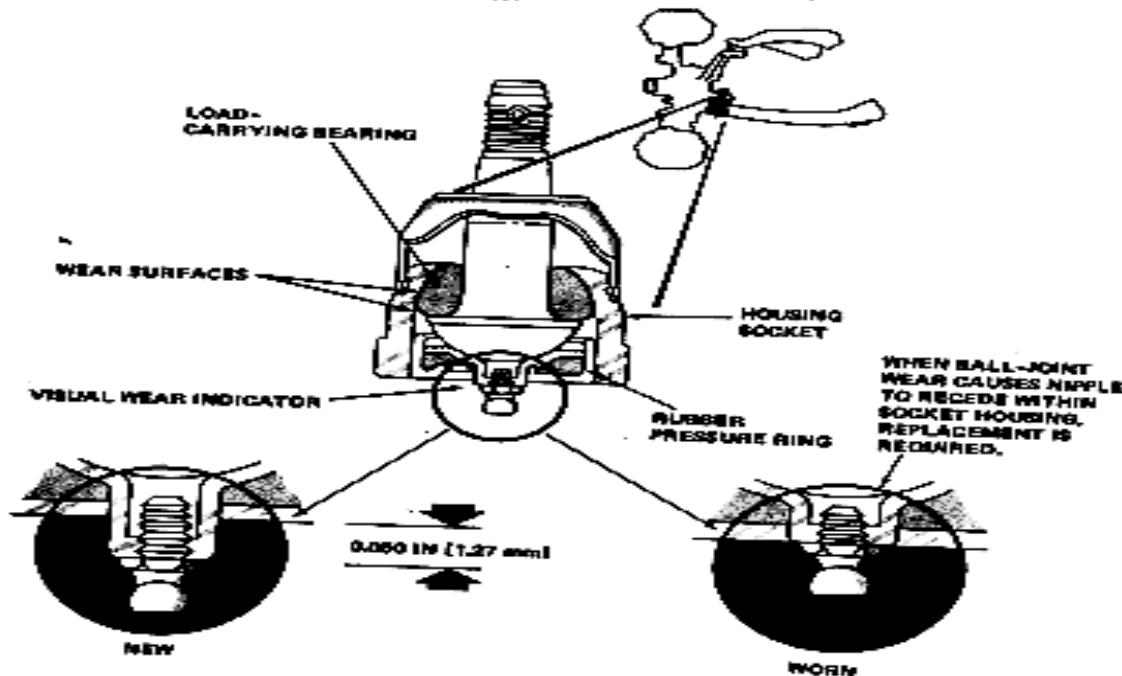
how wear-indicating ball joints show that ball-joint replacement is necessary. In a Worn balljoint, the grease-fitting nipple recedes into the socket, as shown to the right.
